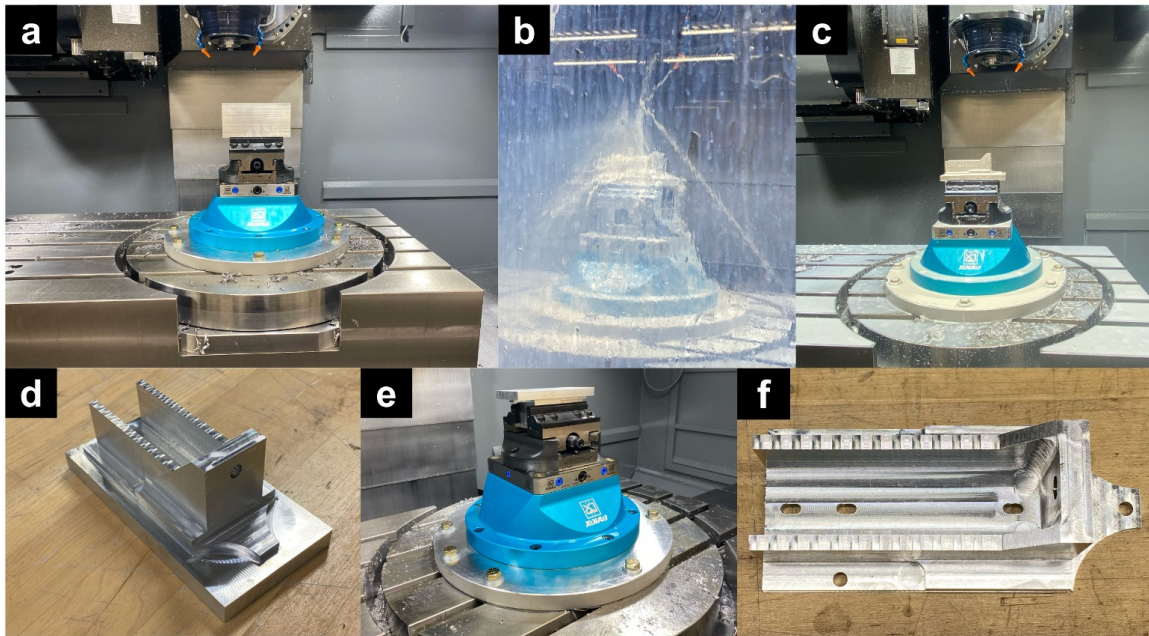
Machining bushing holder on 5-axis milling machine showing (a) initial setup, (b) machining with coolant, (c) resulting part in workholding, (d) removed part with tall walls to make workholding easier, (e) second setup, and (f) completed part with drill holes from second setup.
